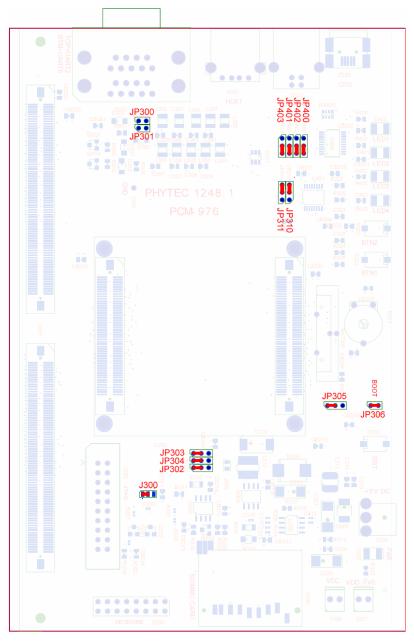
Default Jumper Settings of the phyCORE Carrier Board with phyCORE-LPC3180
